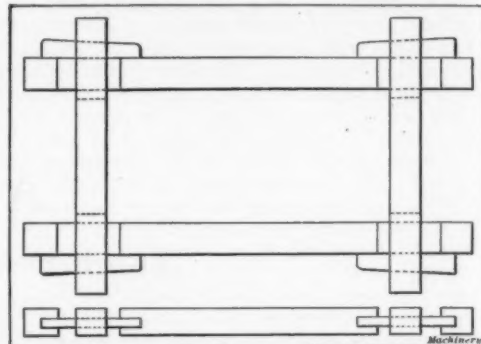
The Chase in Which the Type is Held for Grinding.
